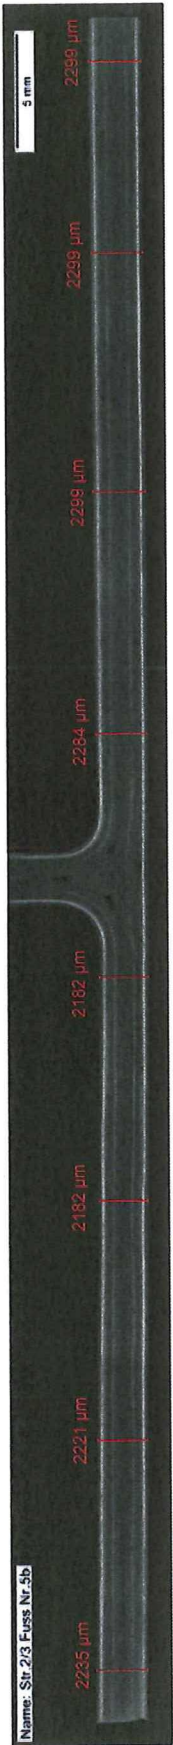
Cross section of panel 6 stringer 1 skin
